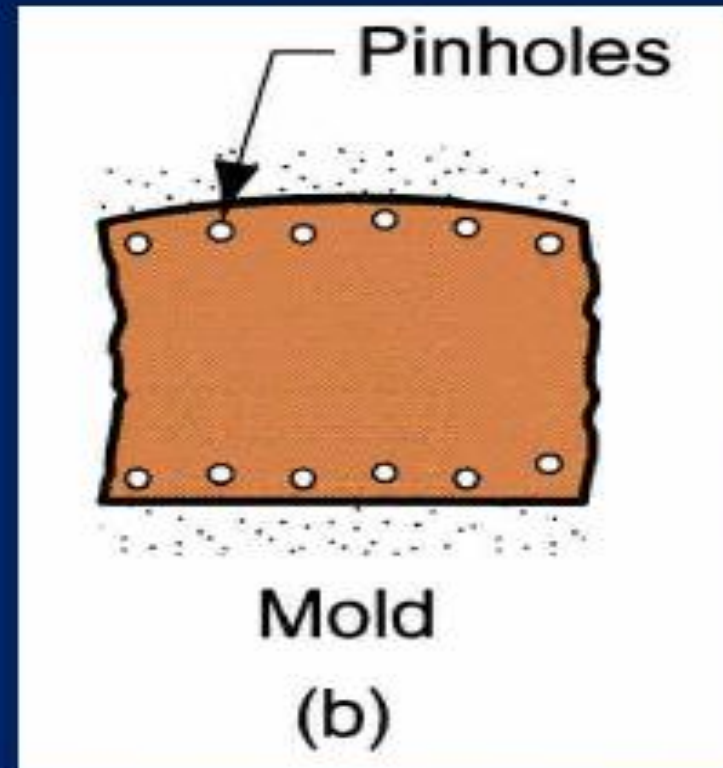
Common defects in sand castings: (b) pin holes
